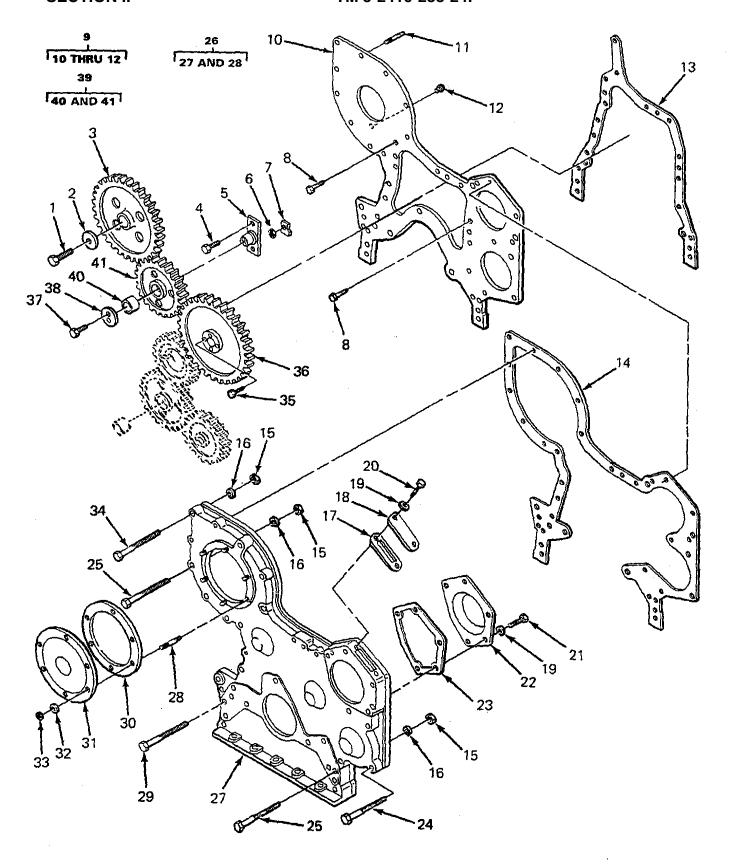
TIMING GEAR HOUSING AND COVERS, 5R3715, 5R7757, 5R8357 ENGINES.
